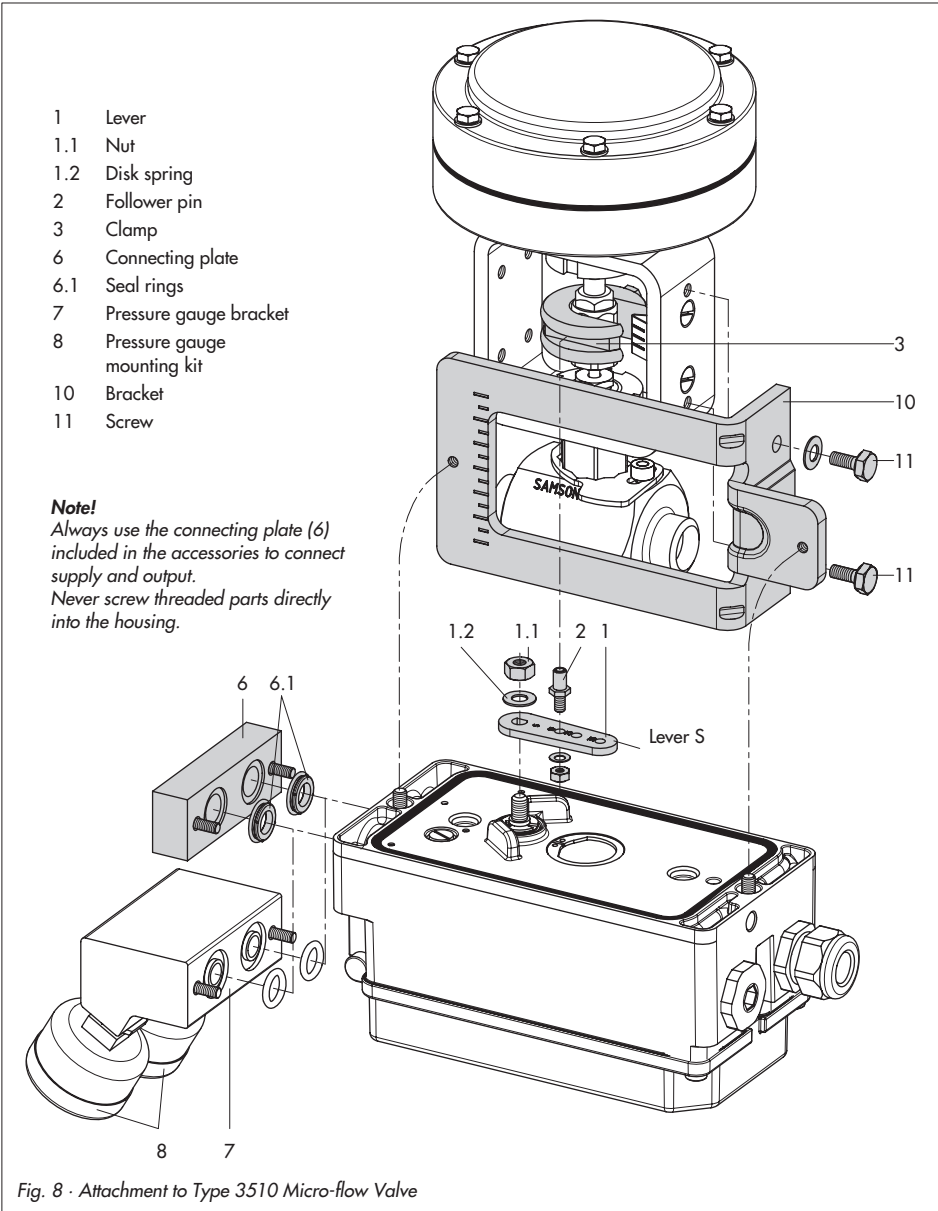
Attachment to Type 3510 Micro-flow Valve
